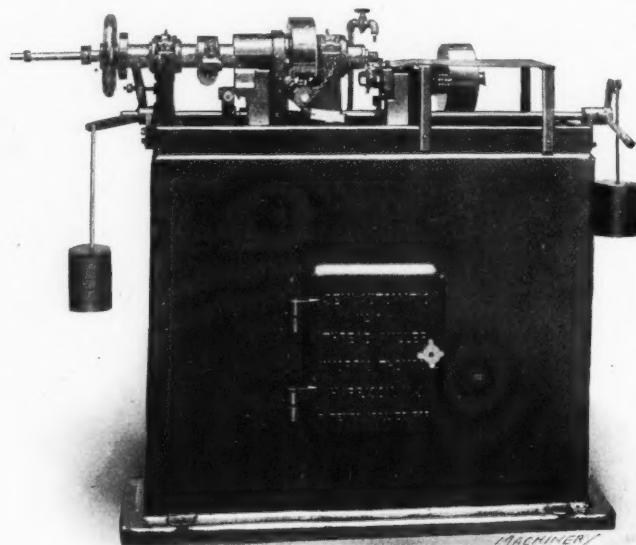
Semi-automatic Machine for milling Threads on Ends of Rifle Barrels
